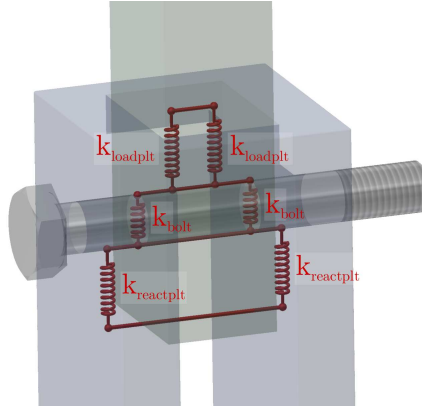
Schematic representation of spring assembly used to model bolt double-shear test assembly.
